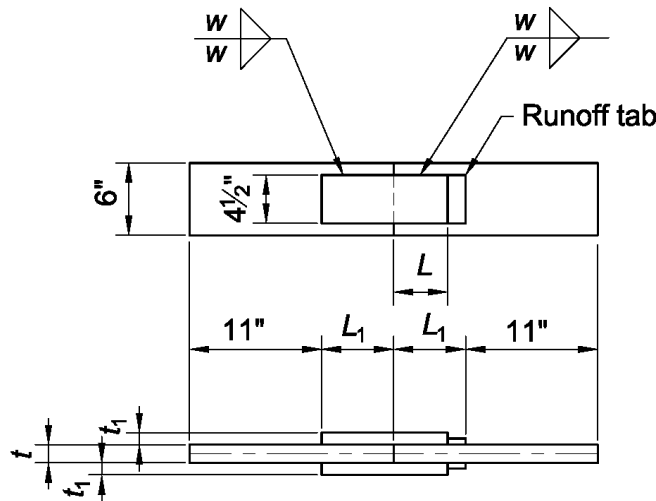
Longitudinal fillet weld specimens.
